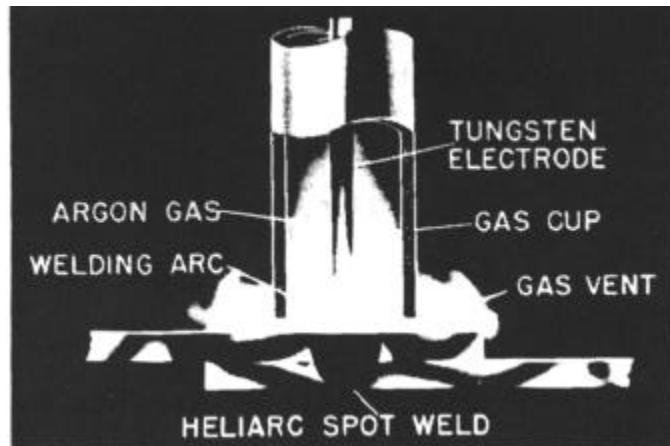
GAS TUNGSTEN-ARC WELDING PROCESS
